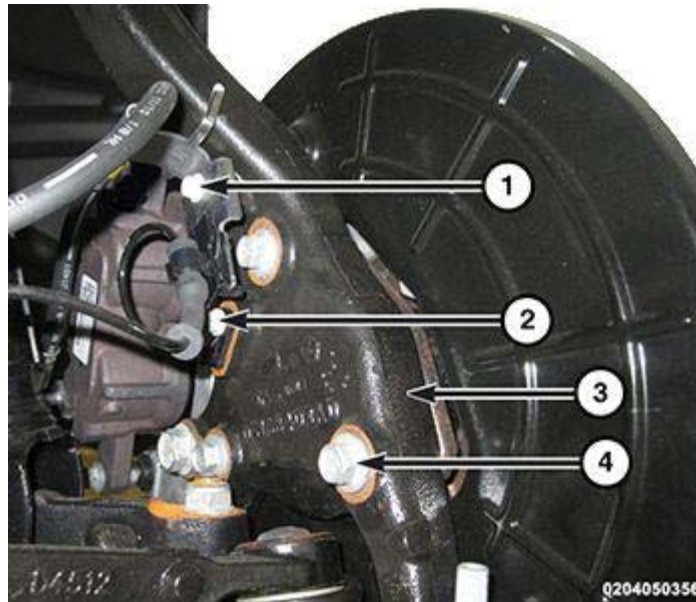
Front Brake Hose Support Bracket Bolt & Front Hub And Bearing To Knuckle Bolt
